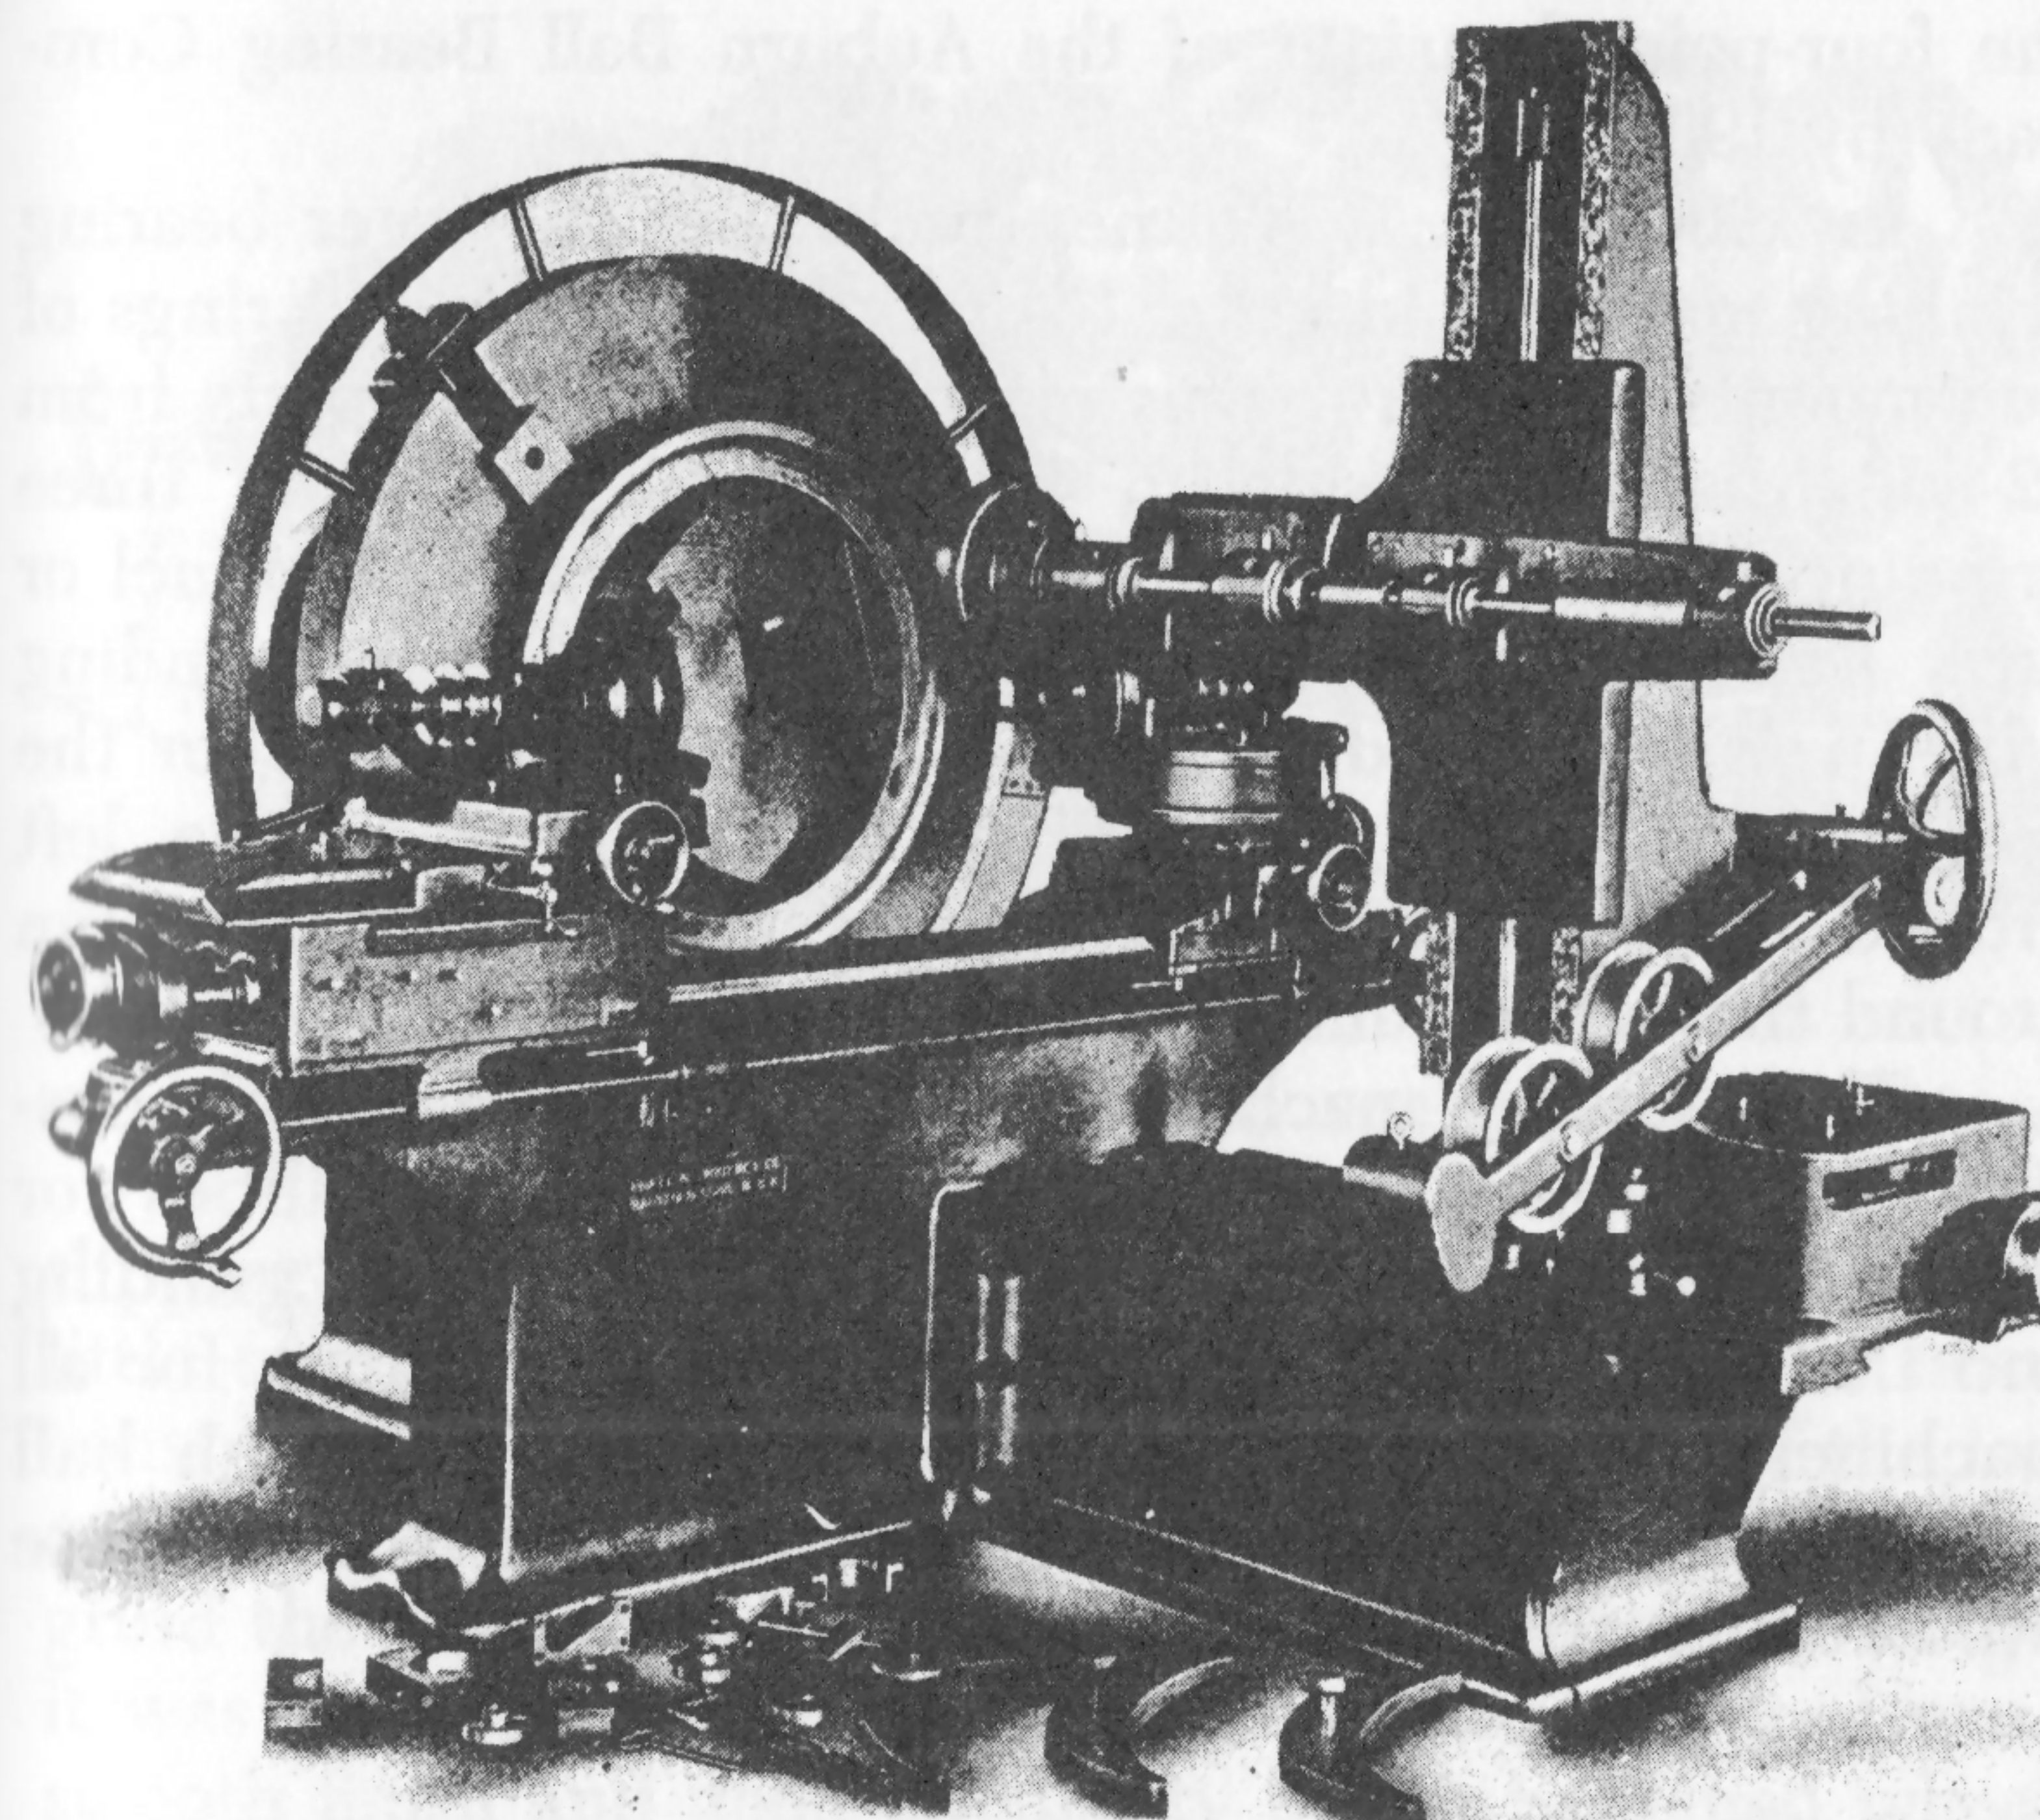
PRATT & WHITNEY GUN MOUNT GRINDER, 1906
